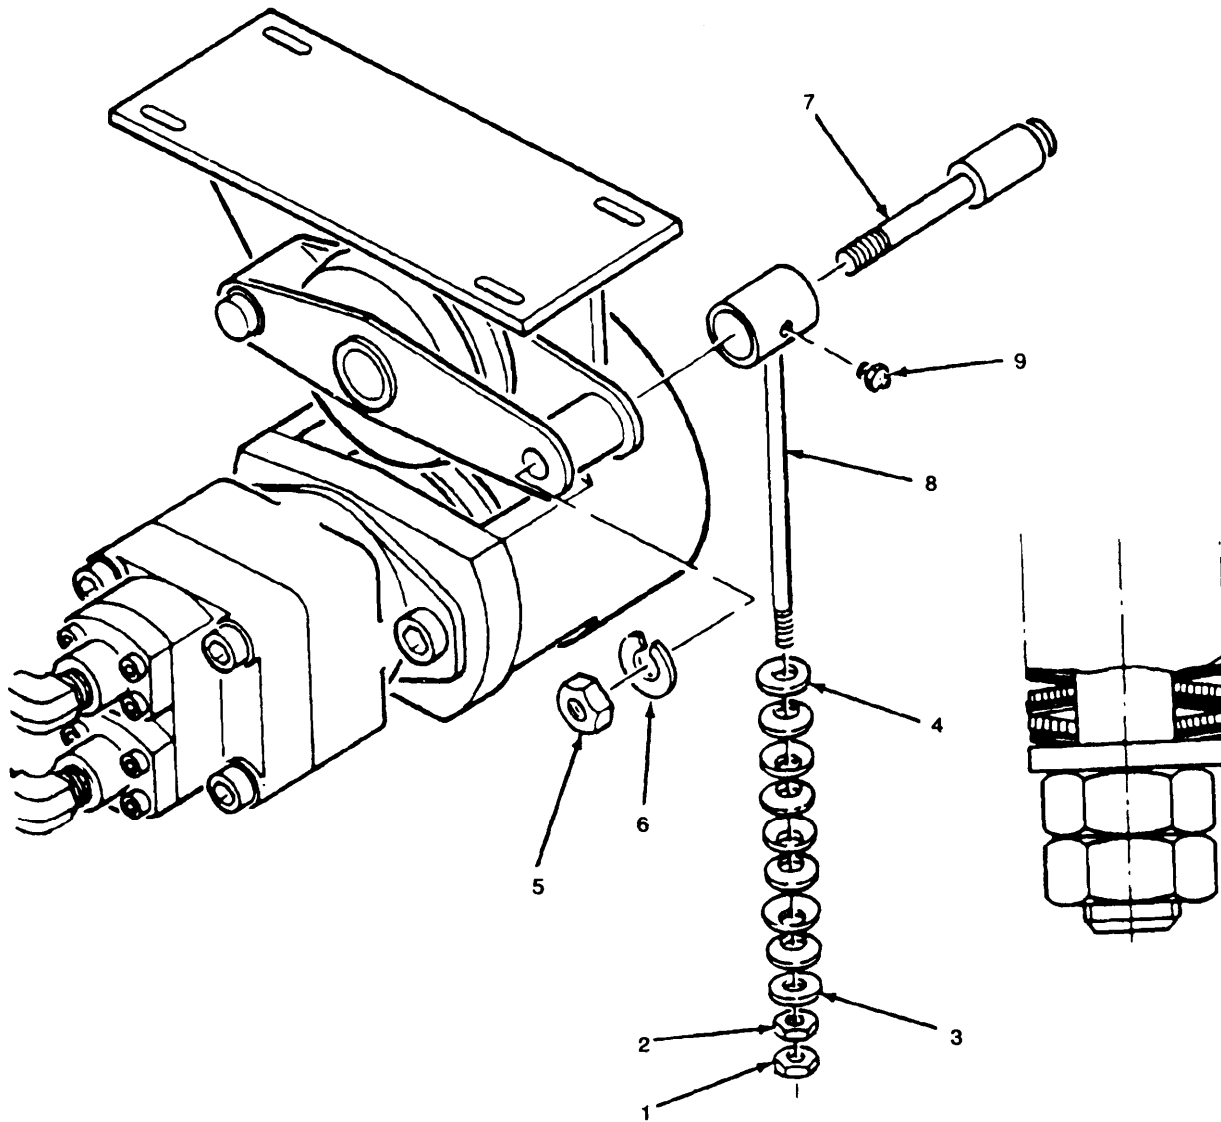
Cable Tensioner Assembly Repair (Sheet 4 of 4).
